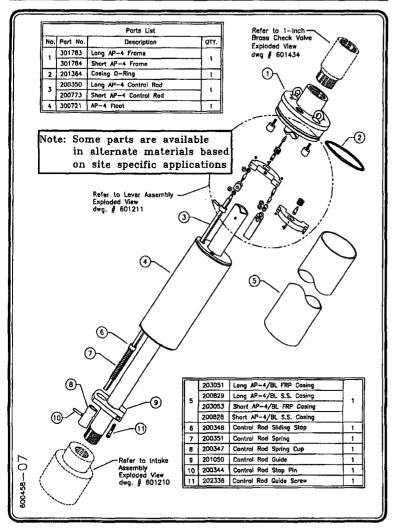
Exploded View of a Bottom-Loading AutoPump AP-4 (Long & Short)
